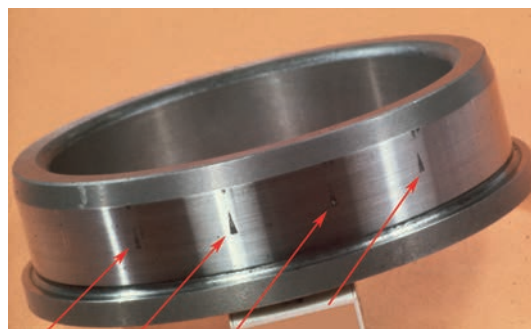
Indentations on the inner ring raceway of a cylindrical roller bearing caused by incorrect assembly
